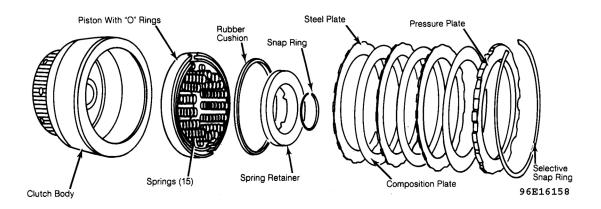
Exploded View of Forward Clutch Assembly Courtesy of FORD MOTOR CO.
